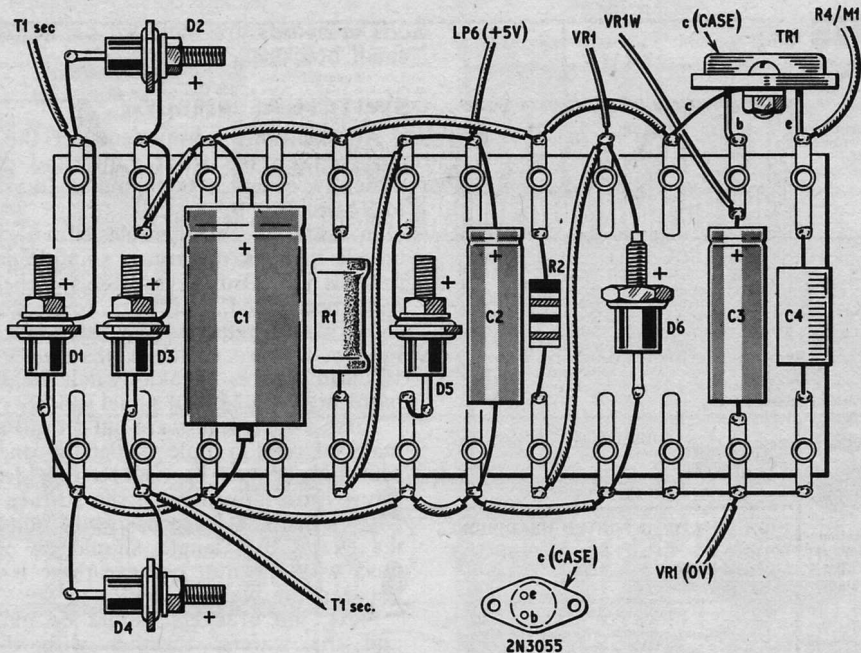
Assembly and wiring details of power supply unit. Both this and the mains transformer are mounted on the chassis base plate (see photograph below)
